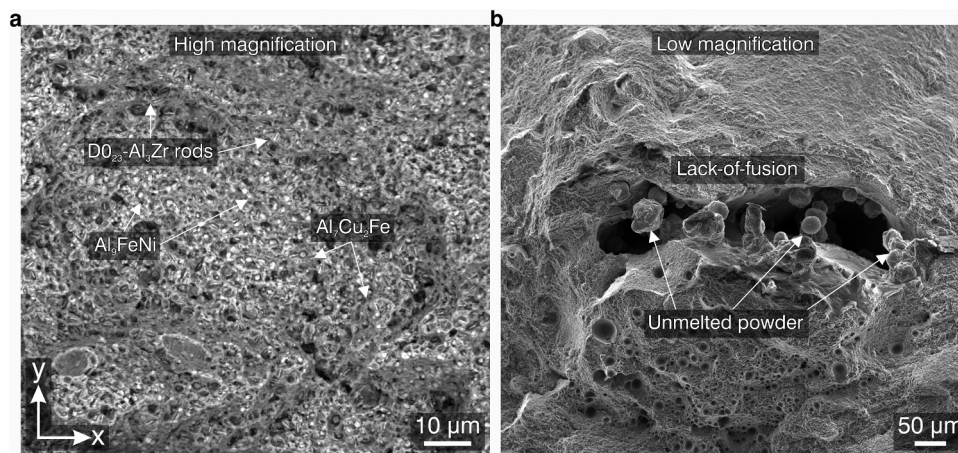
Fracture surface. a) The X-Y fracture surface of the heat-treated specimens (here exemplary after 400 °C, horizontal) reveal numerous bare precipitates, enclosed by a porous fracture surface morphology. b) Lack-of-fusion defects are visible on the fracture surface, which, due to their orientation perpendicular to the loading direction, have a detrimental effect, especially on the mechanical properties of the vertical tensile test specimens.
